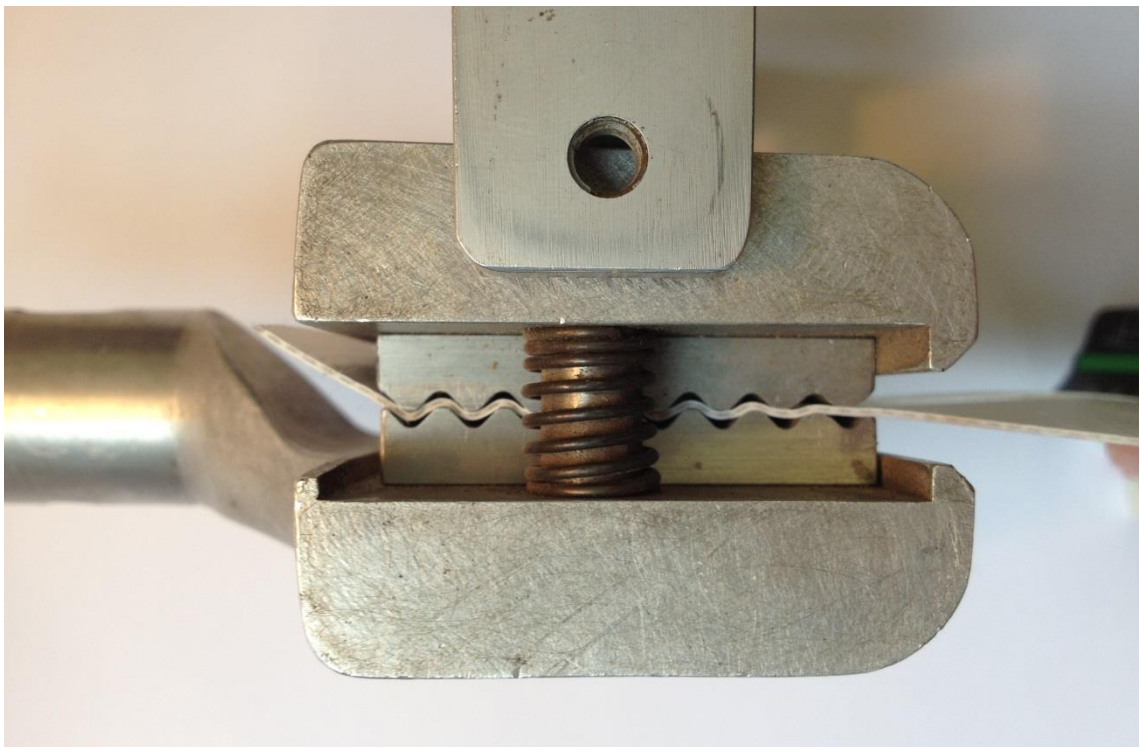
Existing clamp design with coarse teeth, in which test specimens are observed to slip through clamp during testing
